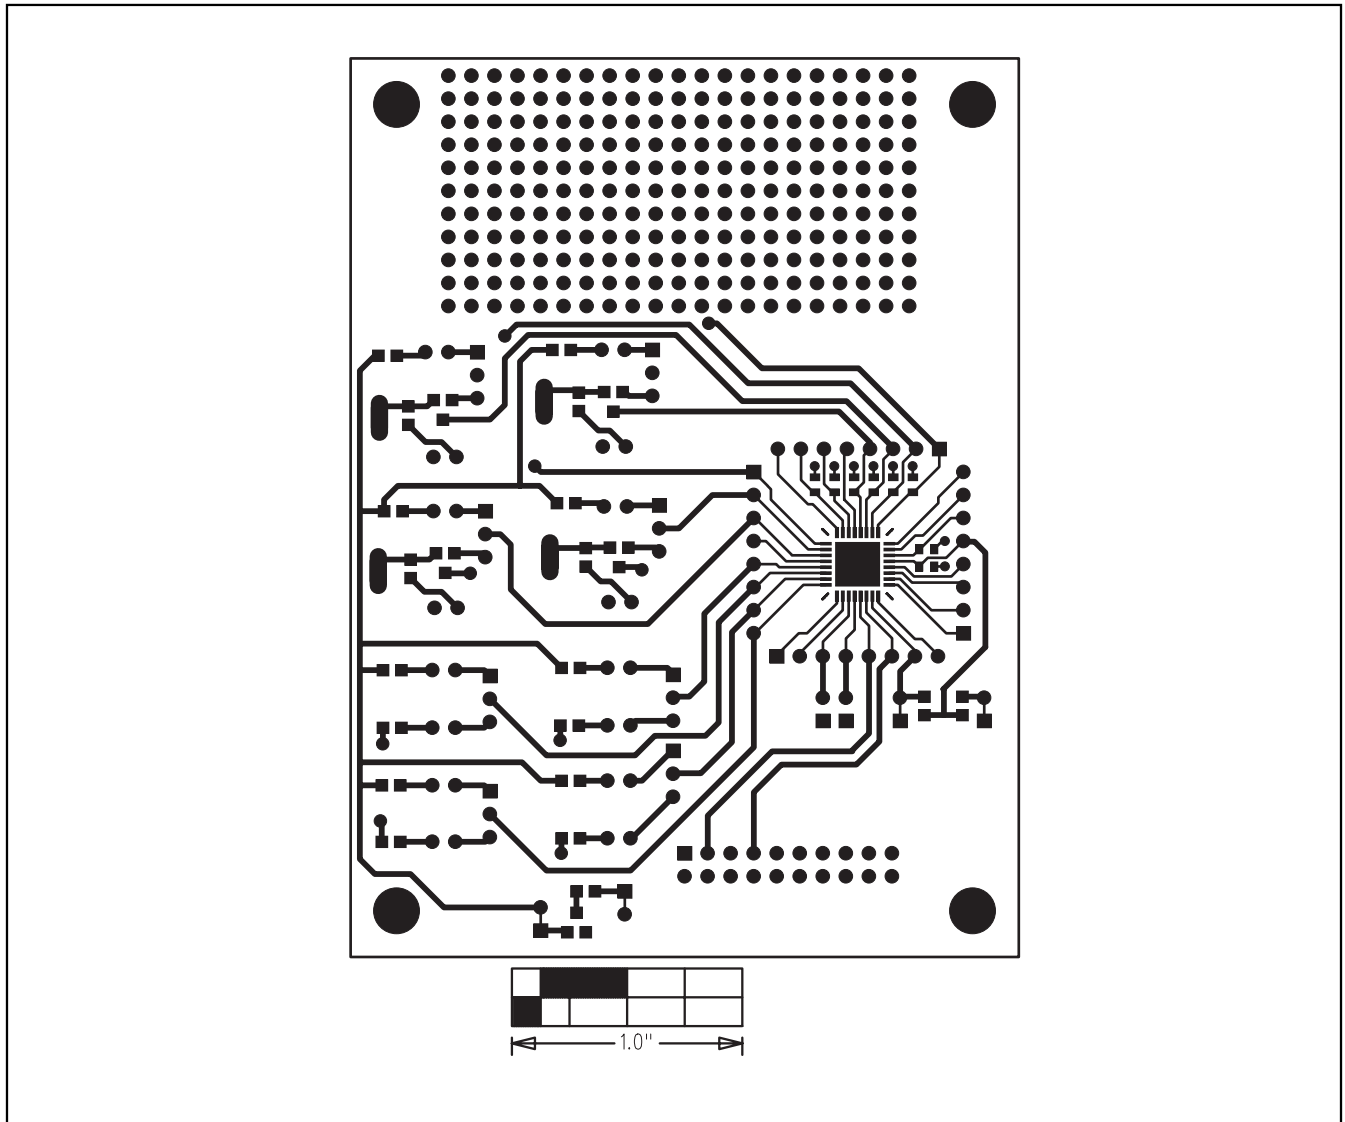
MAX6870 EV Kit PC Board Layout—Component Side
